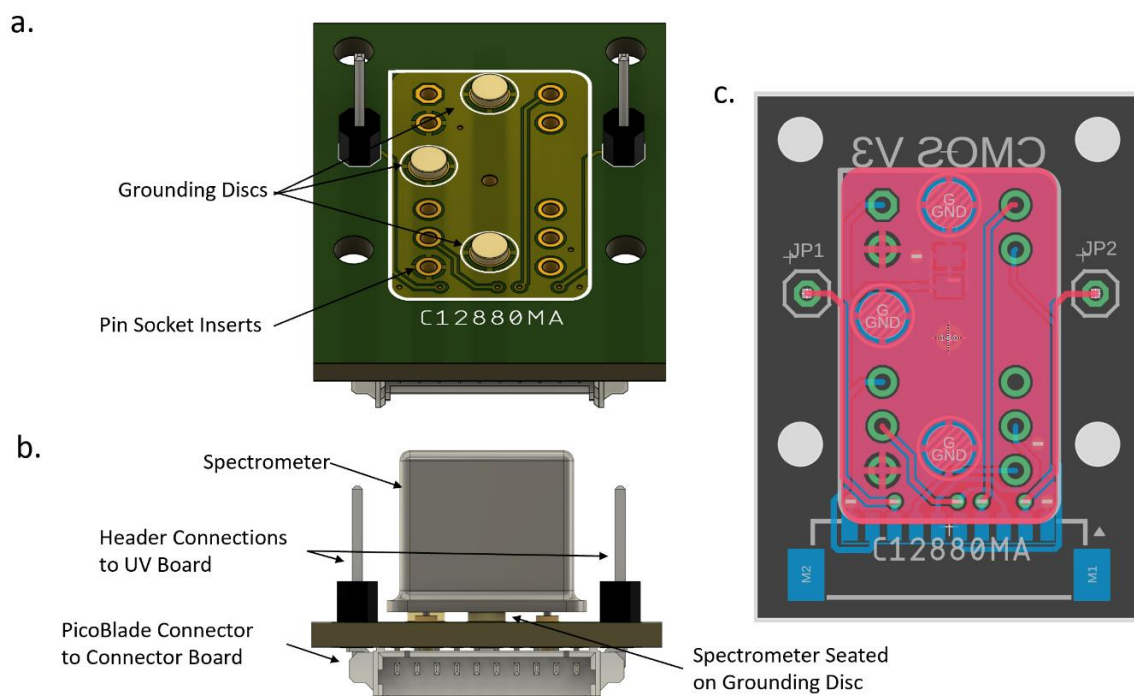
C12880MA spectrometer mounting board. (a) Labelled 3D model view of the top side of the spectrometer mounting board showing brass contact mounts and pin sockets (b) Labelled 3D model front view of the spectrometer mounting board showing C12880MA mounted with pin sockets, seated on contact surface mounts and header connectors to UV stacked board. (c) PCB
